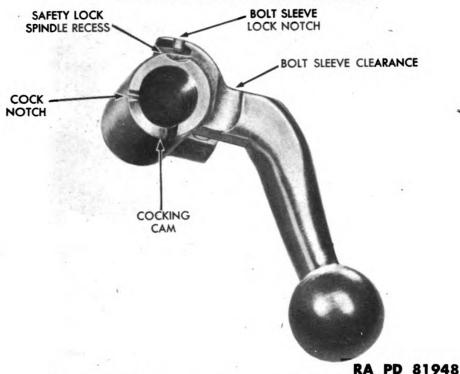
Bolt Handle Group of U.S. Rifle, Cal. .22, M2 — Back View
